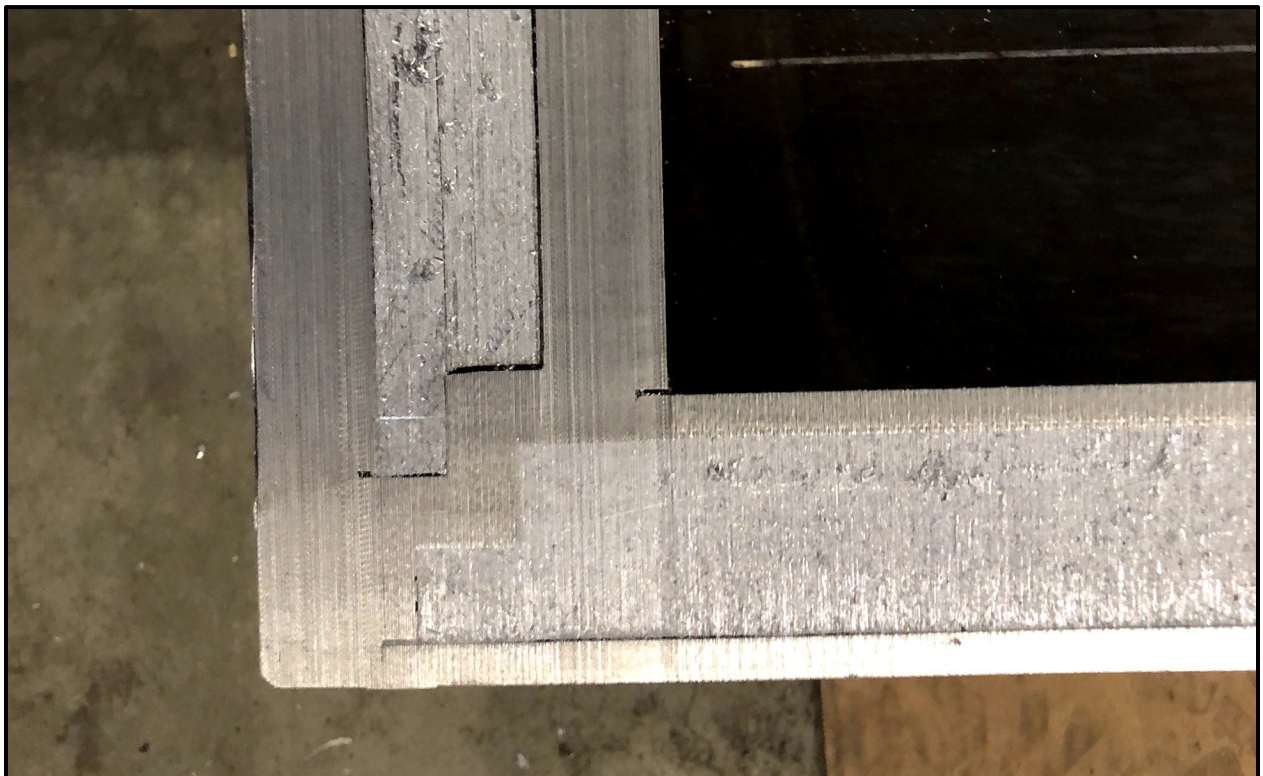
SC-30G2 18TU-01 Destructive Disassembly Cut A at Lower Flange
